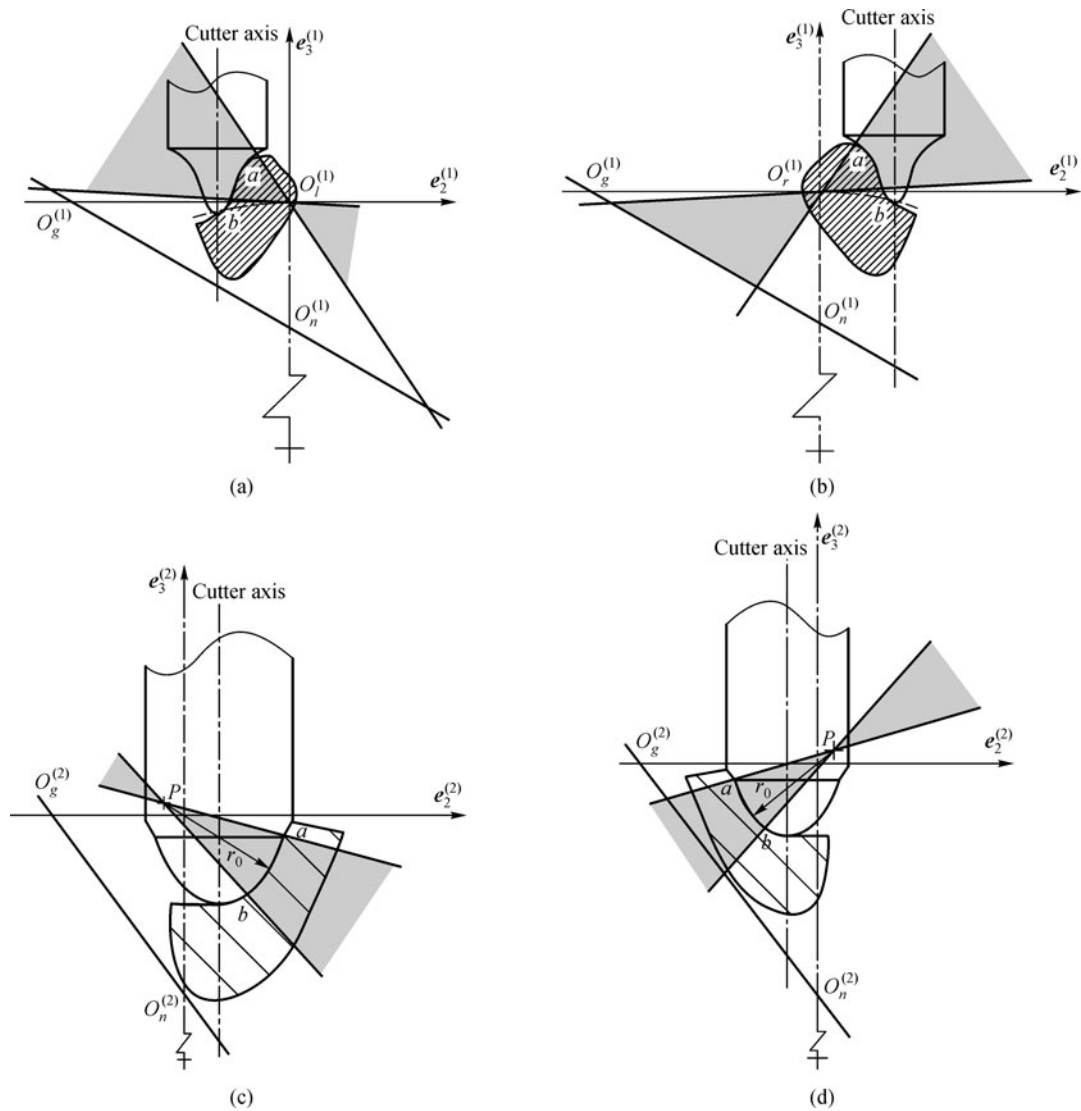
Sketch of the interference area. (a) Left flank of pinion; (b) right flank of pinion; (c) left flank of gear; (d) right flank of gear
